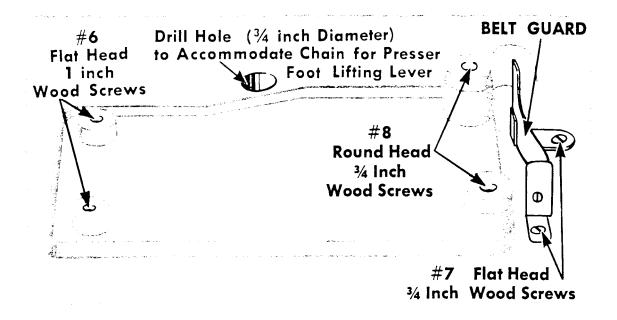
Machine Base on Table, Showing Position and Drill Sizes of Holes Required for Installation
